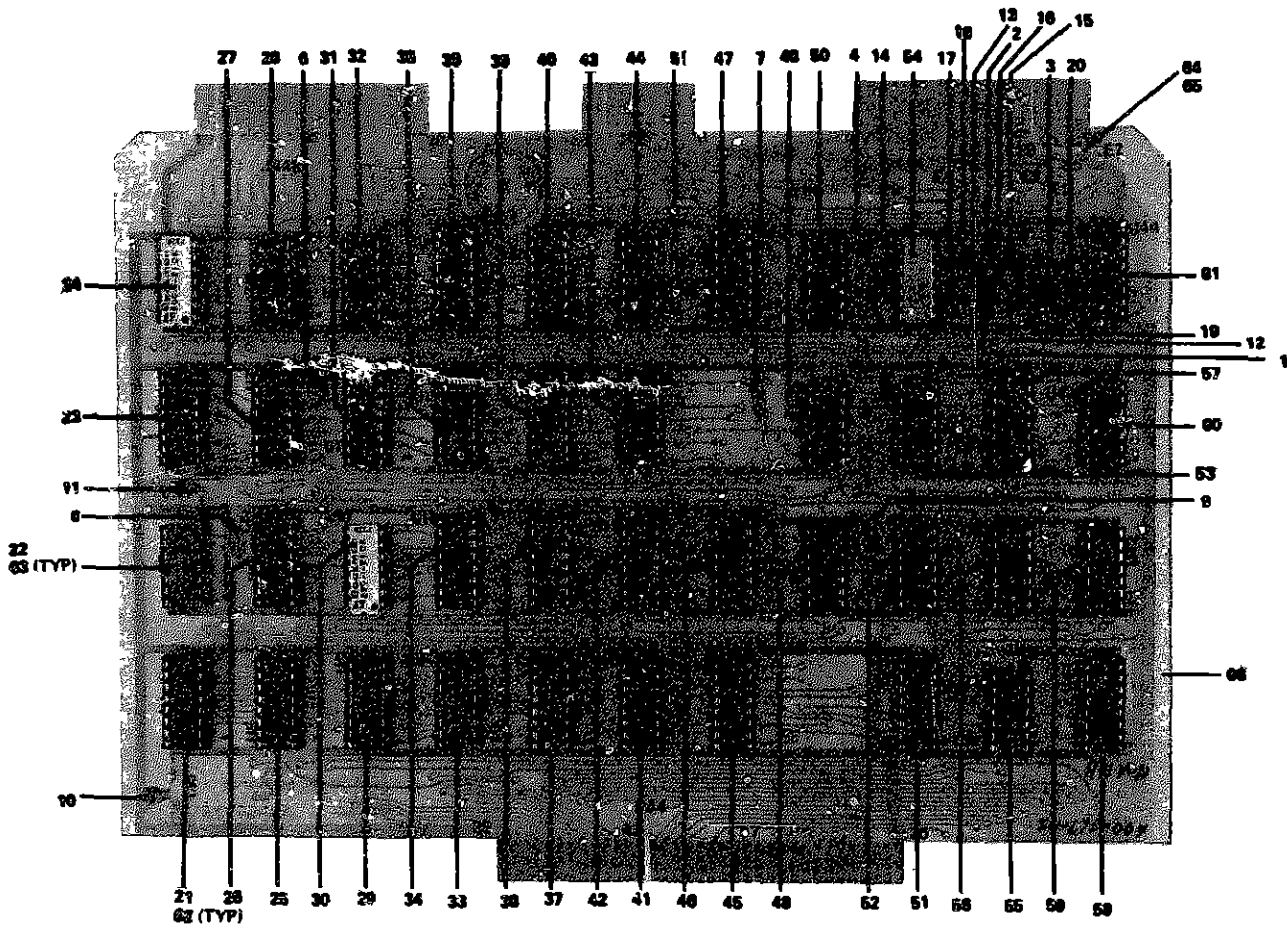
Memory and Output Control Circuit Card Assembly 1A14
